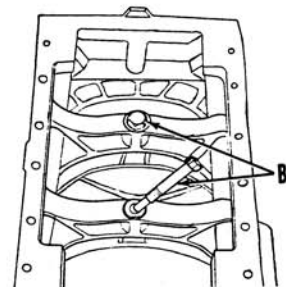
Intermediate main bearing housings are centered and held in place by set bolts (B).
